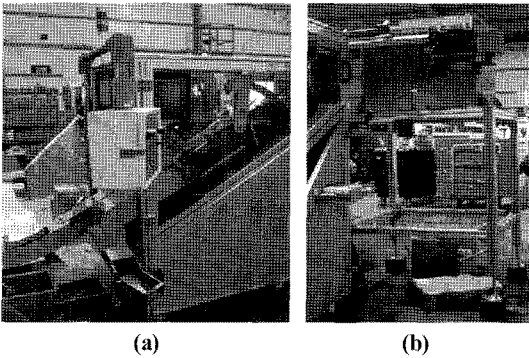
Prototype of slant inspection system and slide feeding system
